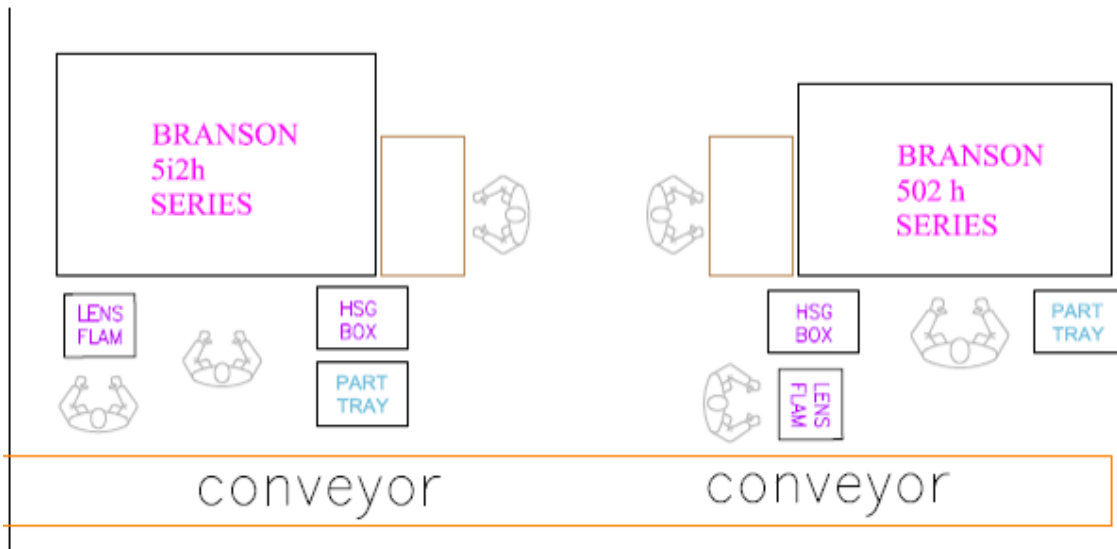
Vibration welding stages for products that need flaming lens
